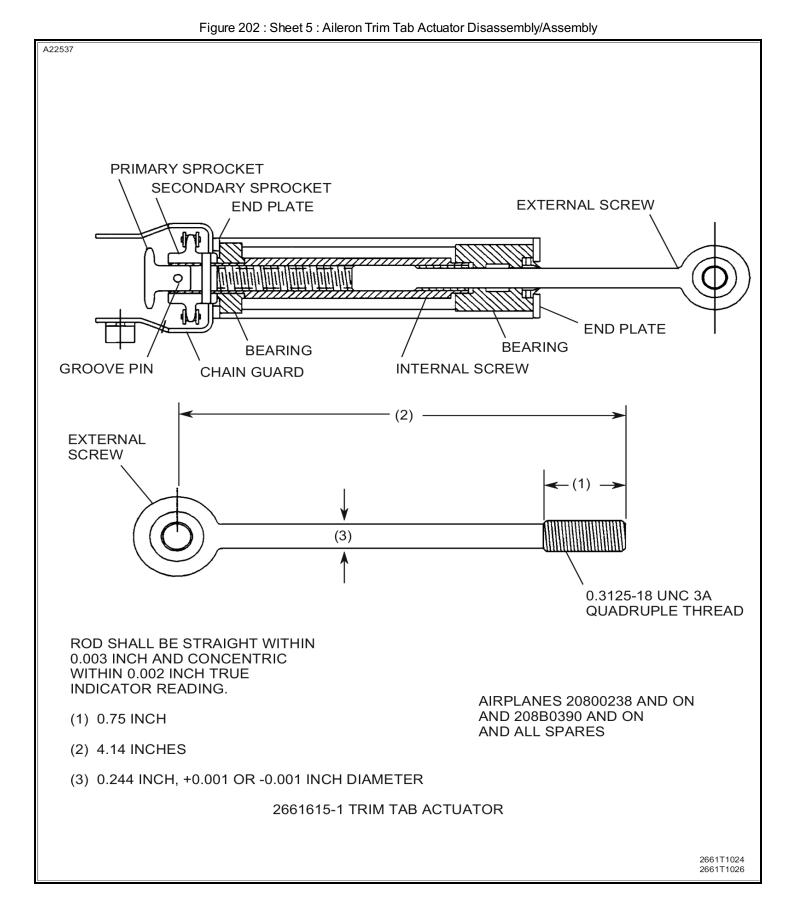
Sheet 4 : Aileron Trim Tab Actuator Disassembly/Assembly
